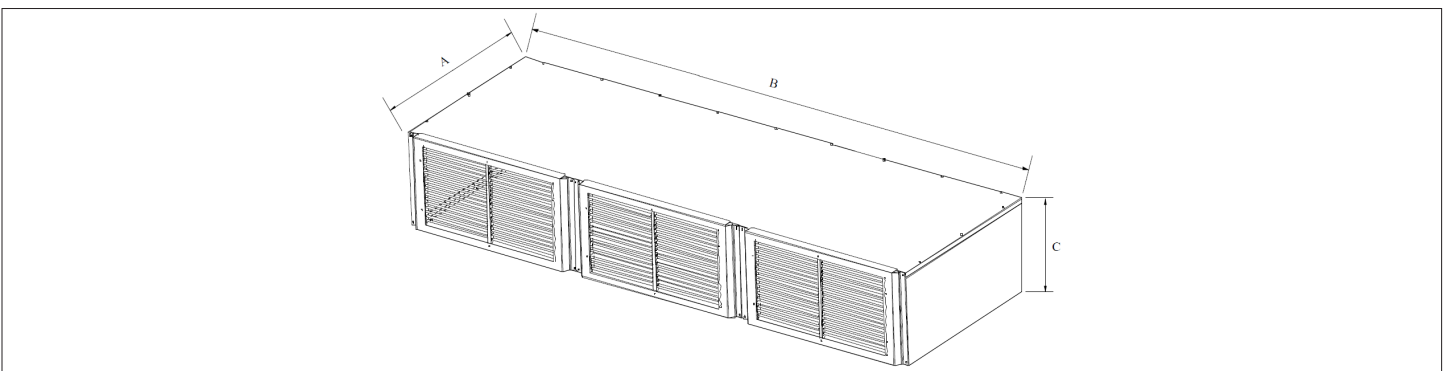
Plenum Dimensions of P3160 to P3200 Upflow Unit
